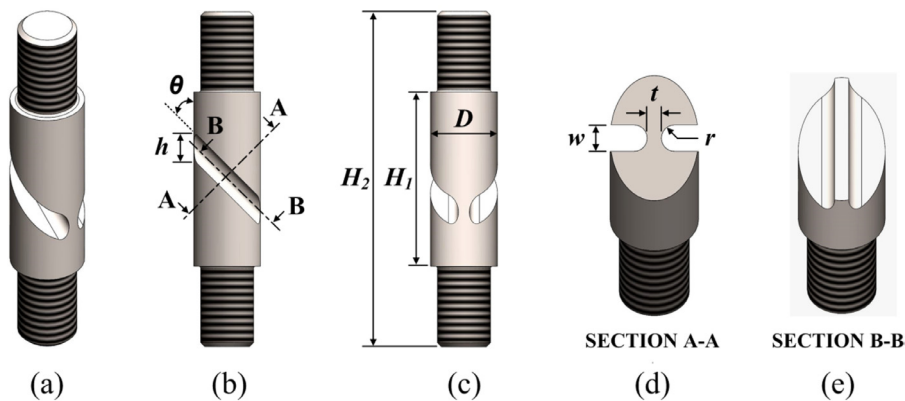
A shear-tension specimen geometry: (a) Isometric projection, (b) Front view, (c) Side view, (d) Section view (A-A) perpendicular to the gauge inclination and (e) Section view B-B parallel to the gauge inclination, which represents the mid-section of the gauge.
